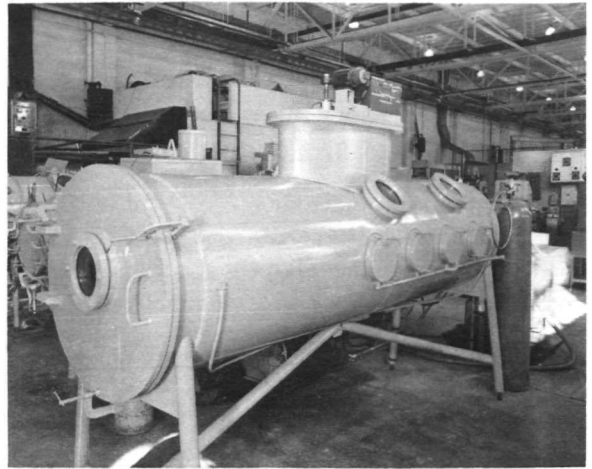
Tank-type controlled-atmosphere welding chamber.
